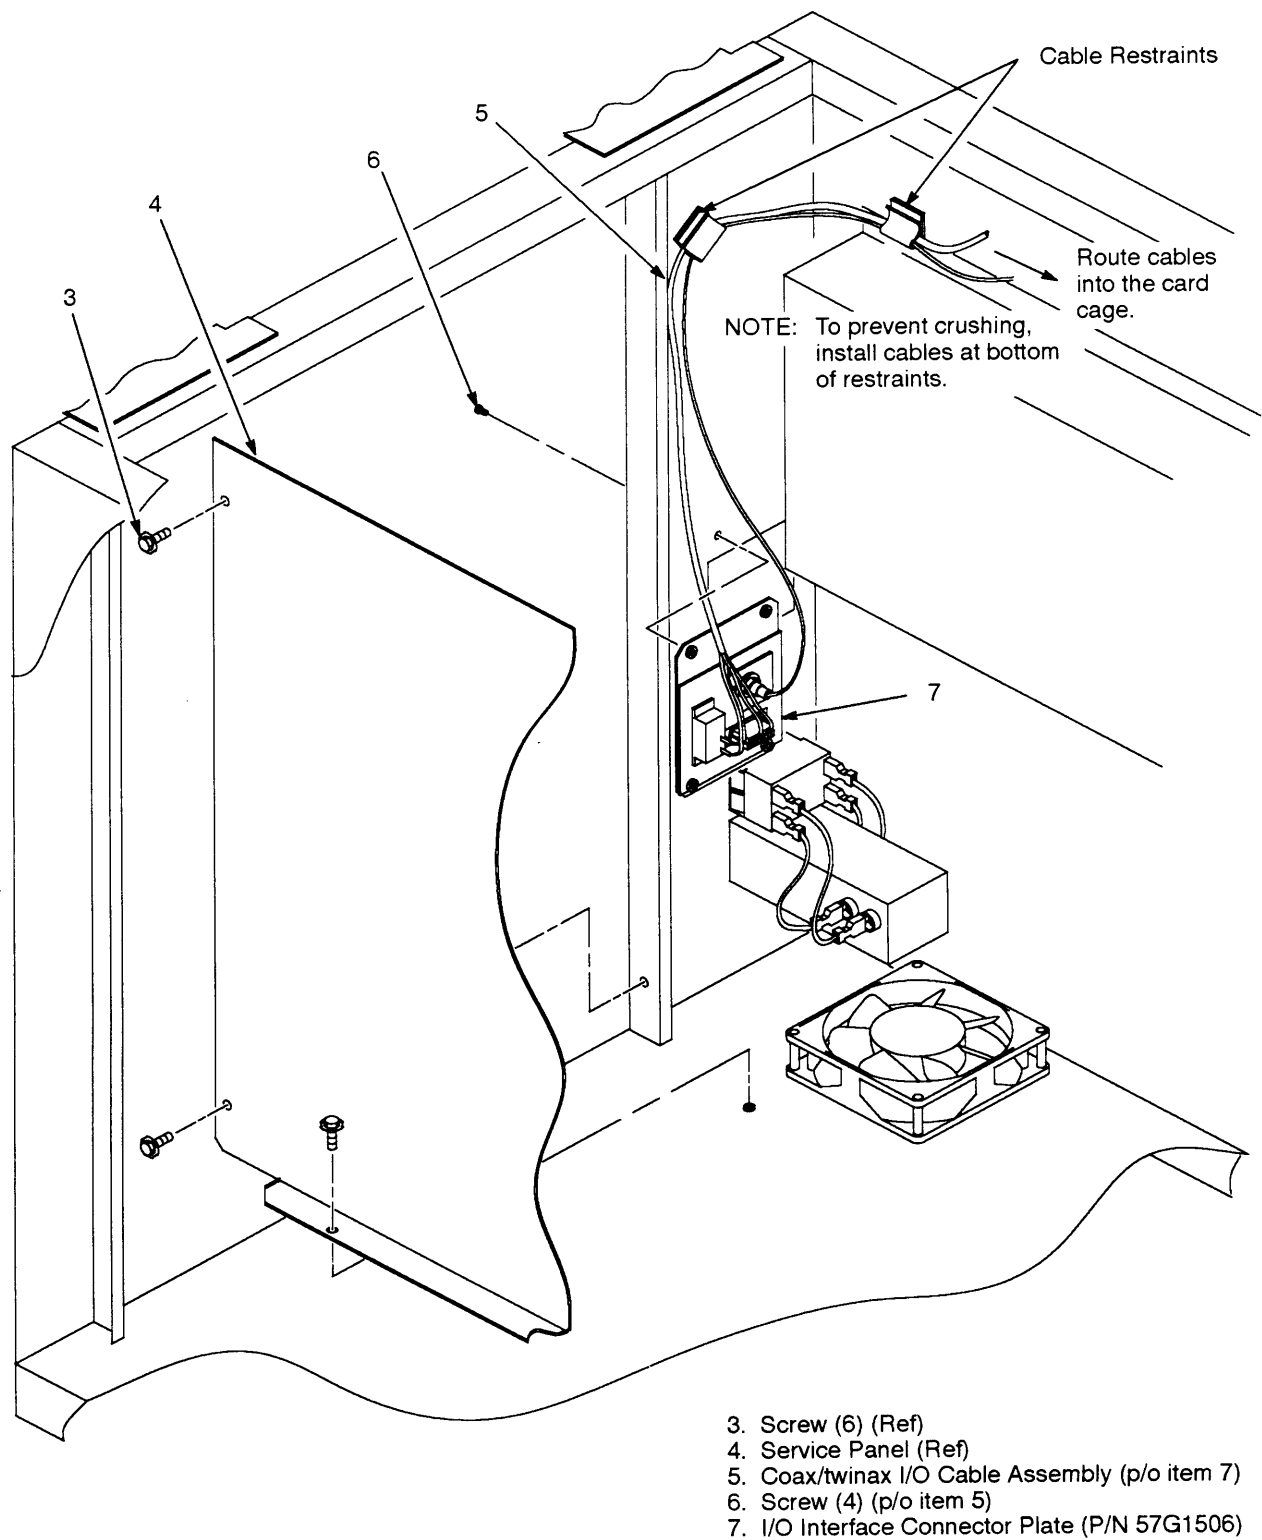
Cable Assy, Coaxial/Twinaxial I/O, Removal
